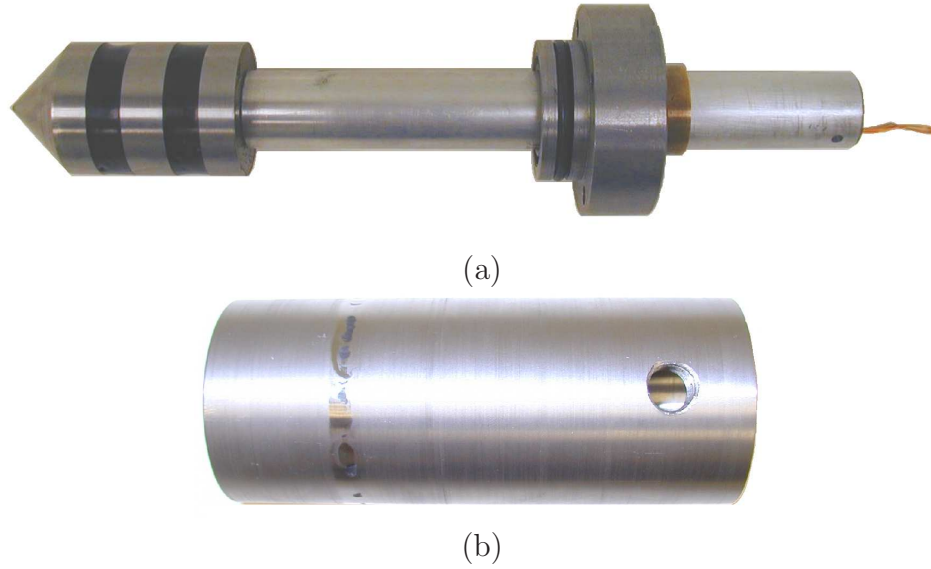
Picture of (a) movable valve piece and removable housing piece and (b) the main housing piece of the MR fluid valve device #1.
